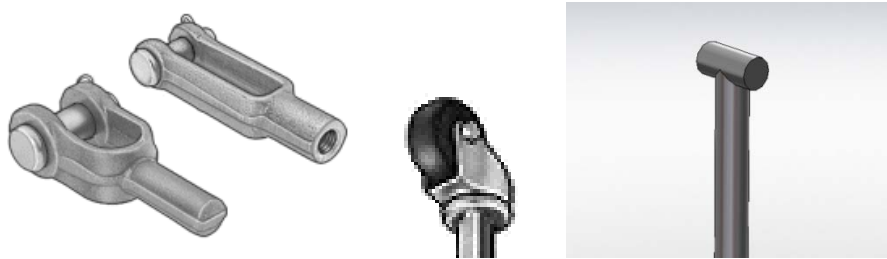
Clevis rod ends (left), wheel rod ends (center), T rod end (right)
